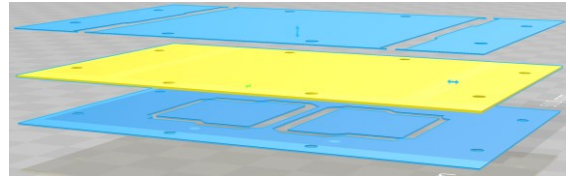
Exploded view of the layer setup for manufacturing of two-sided board using the lift-off technique. Two sacrificial masking layers (blue) are bonded using the support material to the center core dielectric substrate (yellow) and printed all at once. After metal sputtering, the masking layers are peeled-off exposing desired mosaic of metal traces.
